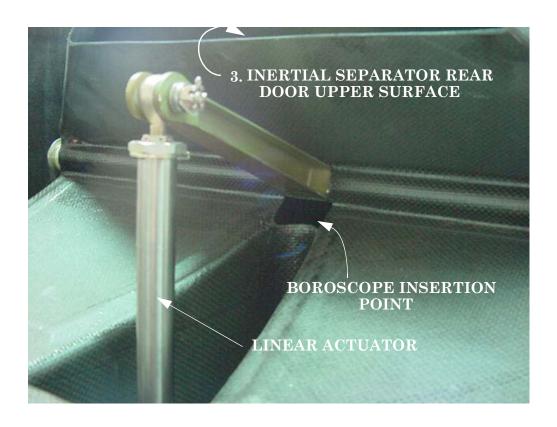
Inertial Separator Rear Door - Visual Inspection (Sheet 3 of 3)
